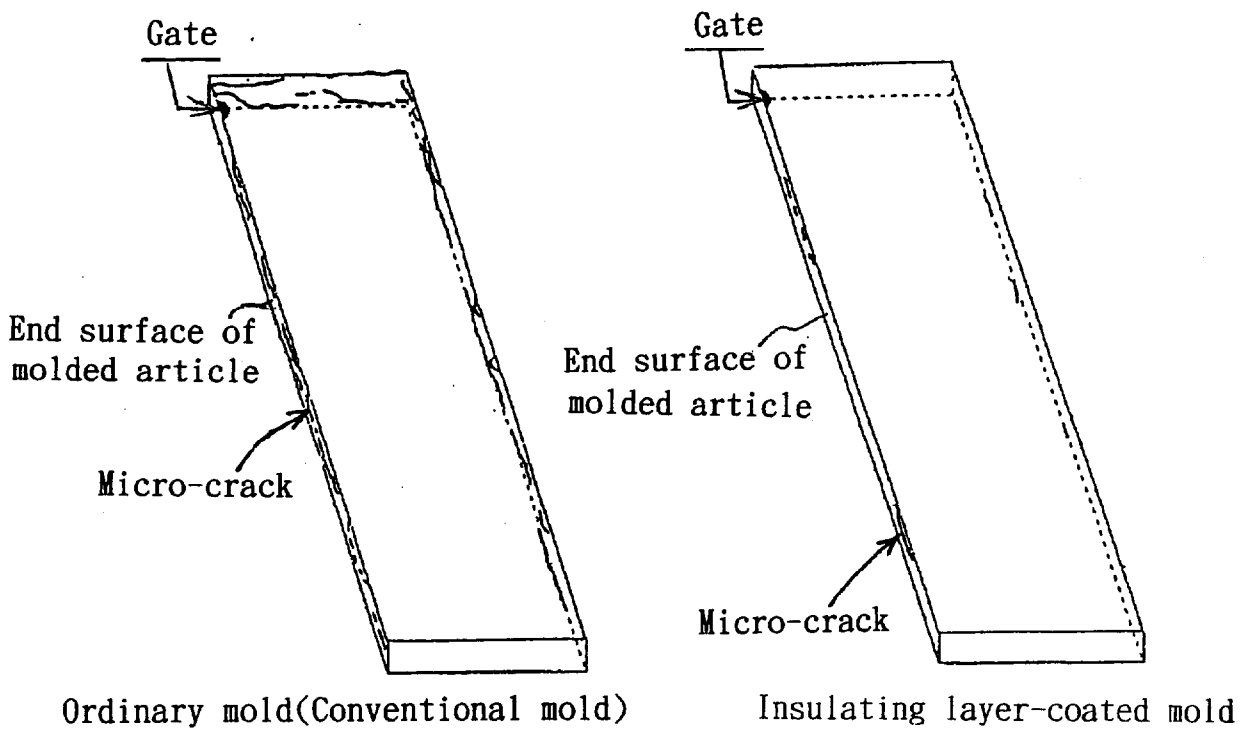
Micro-cracks on the end surface of injection-molded articles caused by solvent.
